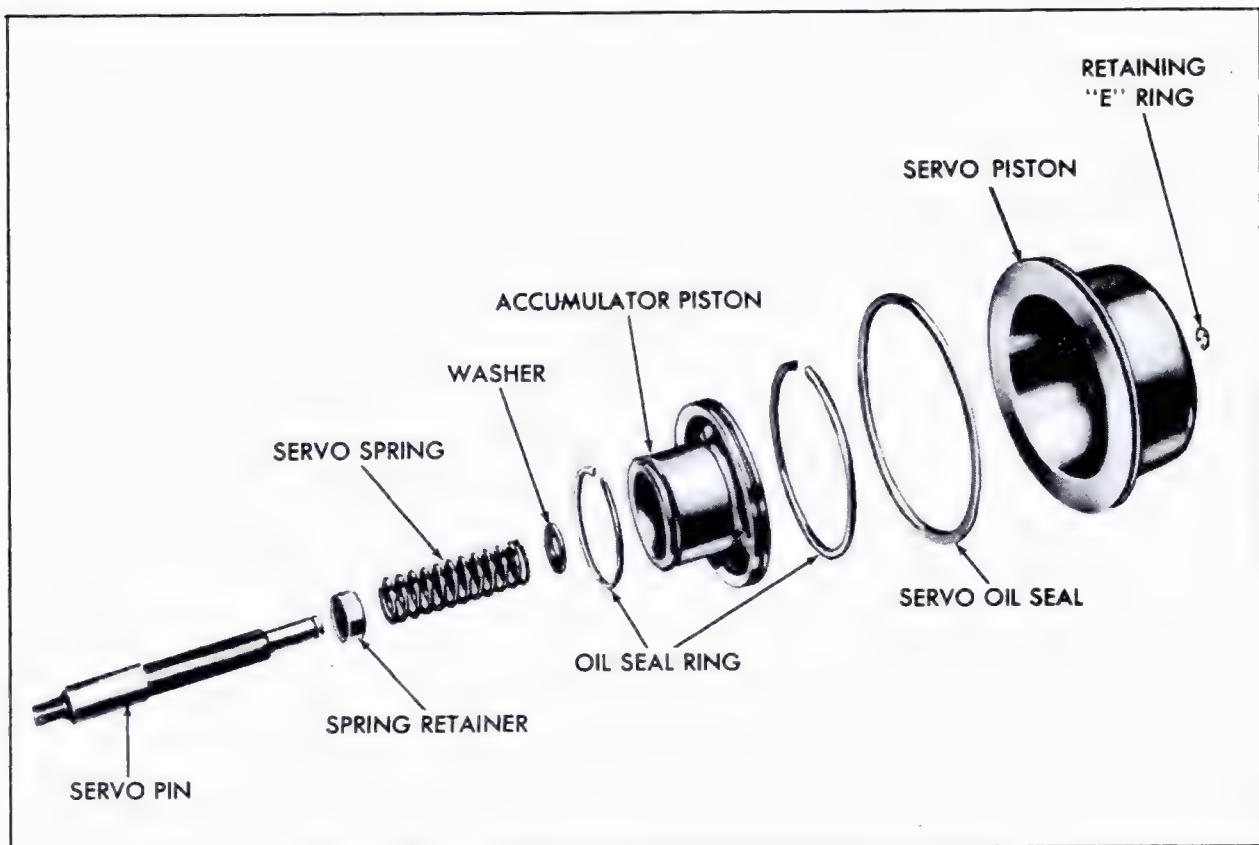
Rear Servo and Accumulator Assembly Disassembled
